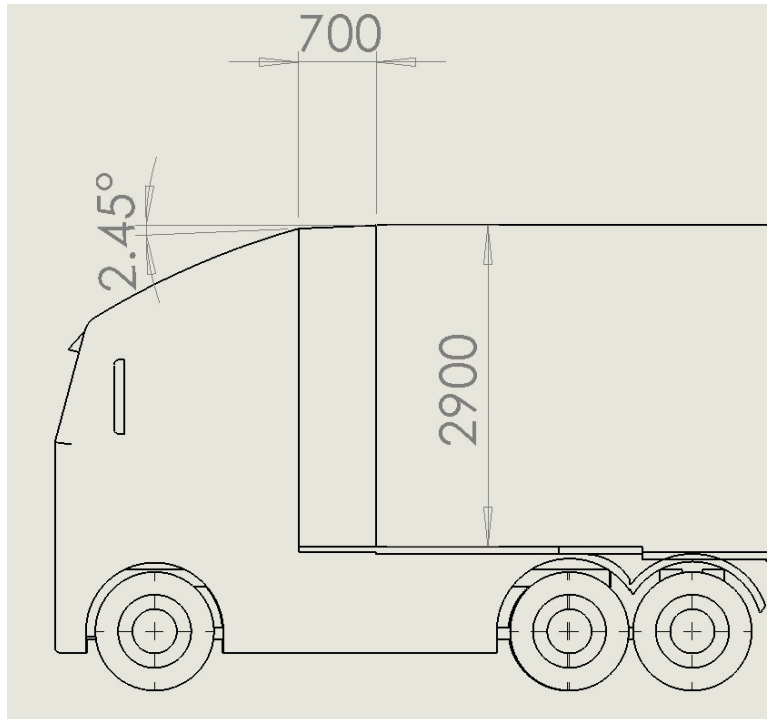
Cab-Trailer Gap Treatment Dimensions
